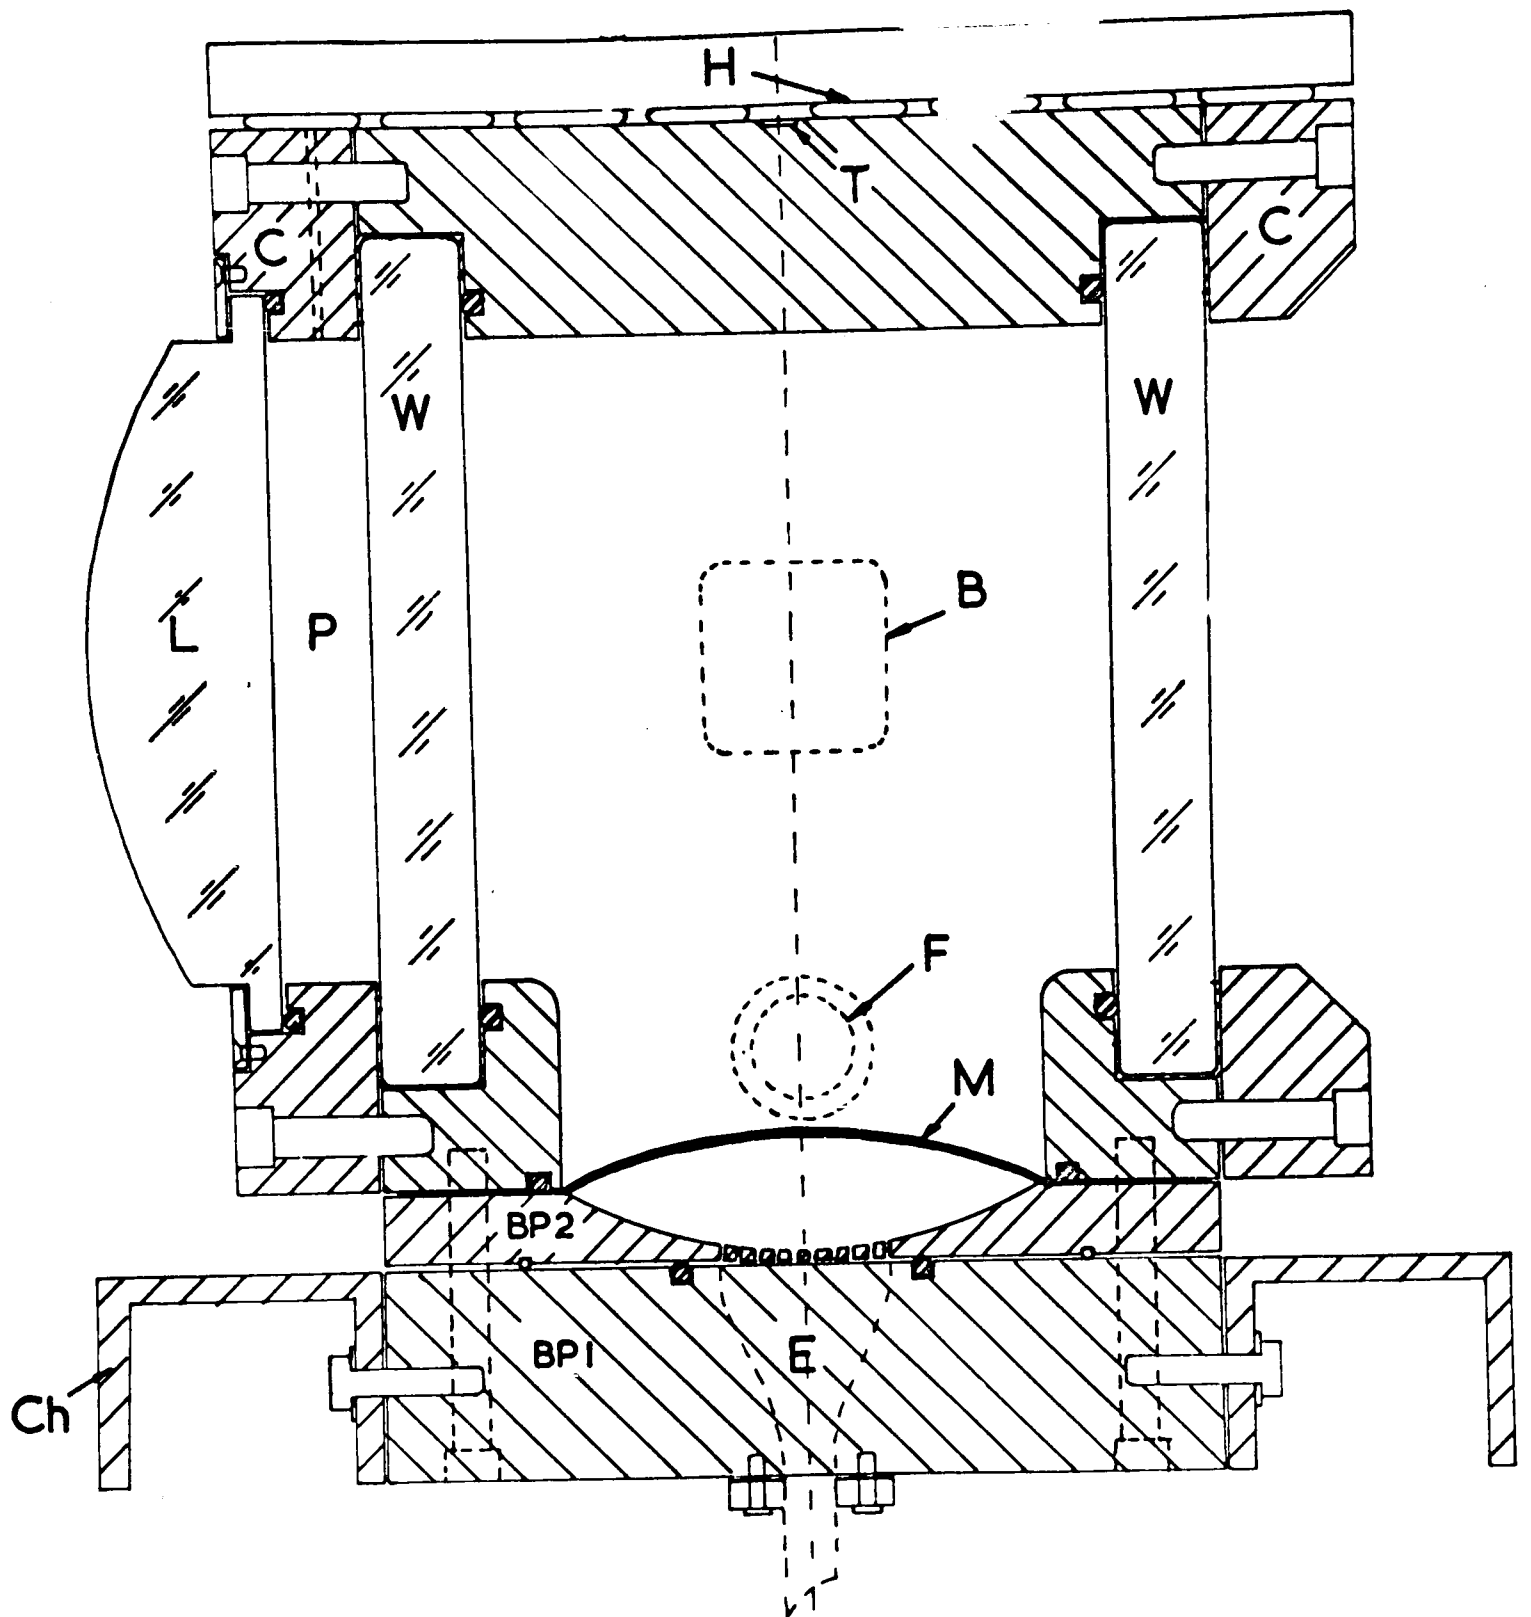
CROSS-SECTIONAL VIEW OF CHAMBER BODY
